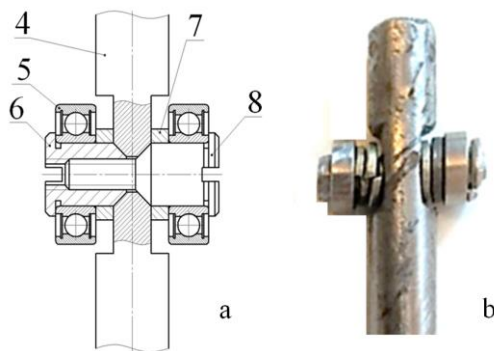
Ball bearing screw: an idea (a) and embodiment (b)
